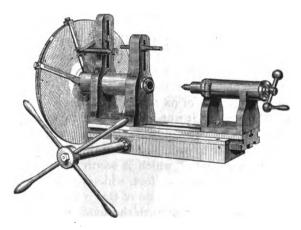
Gear-cutting attachment to the universal milling-machine.
